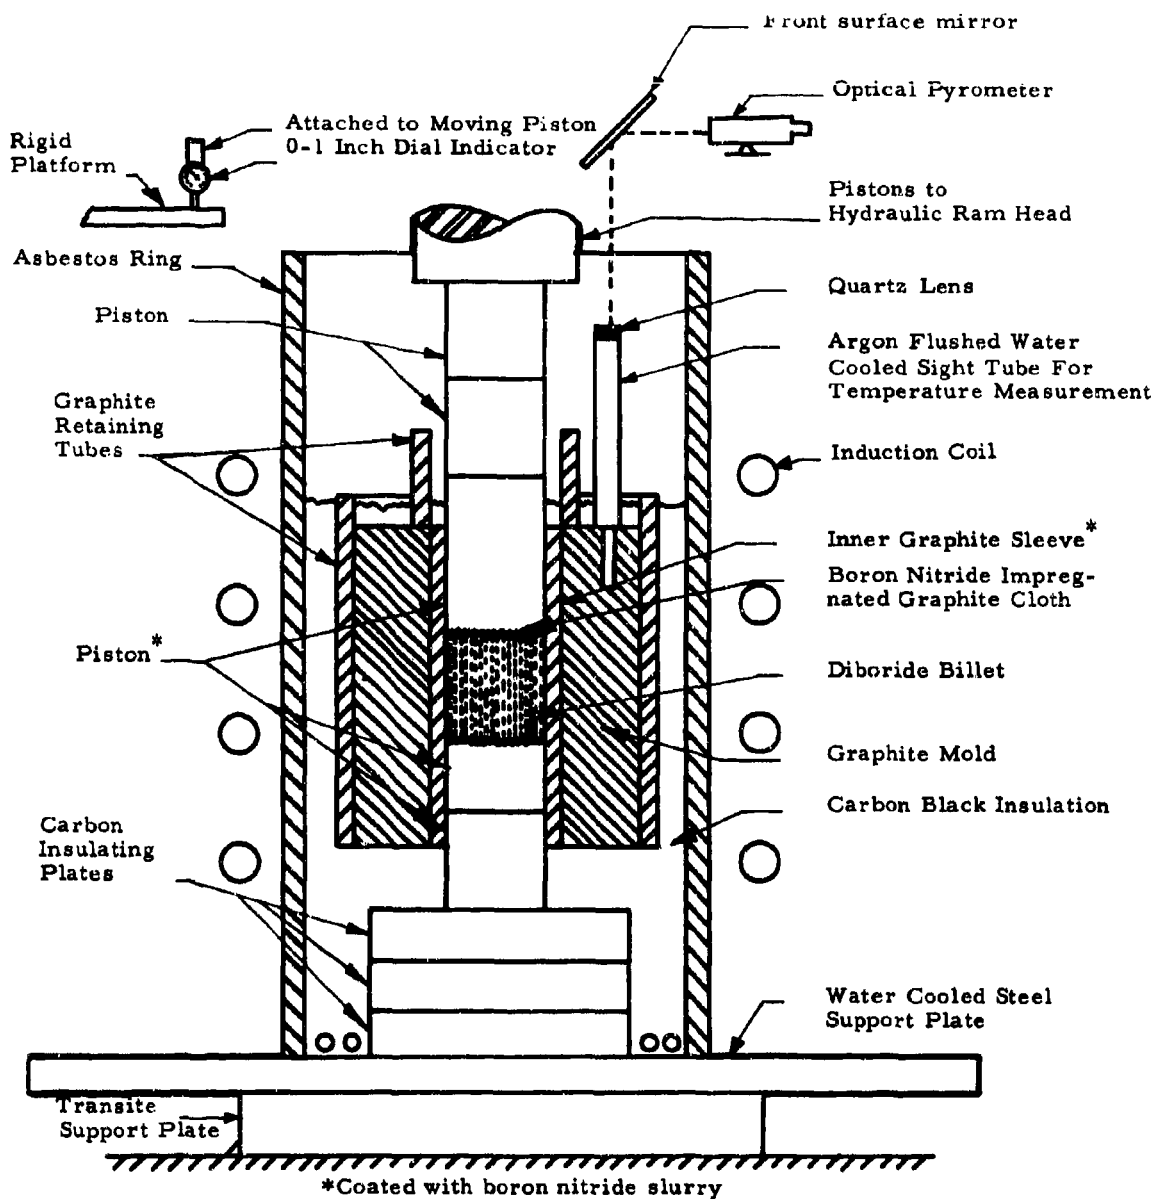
Schematic Drawing of Graphite Hot Pressing Assembly.
